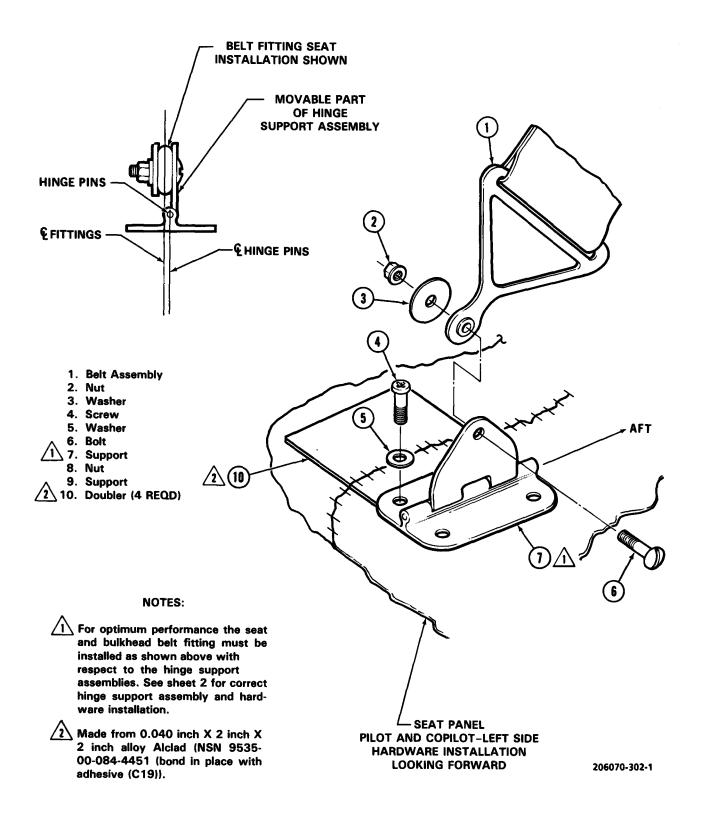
Crew end Passenger Seat Belt Installation (Sheet 1 of 2)
